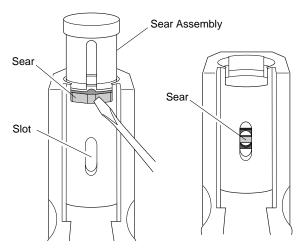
Inserting Sear Assembly Into Cylinder As Viewed From Bottom Of Tool
